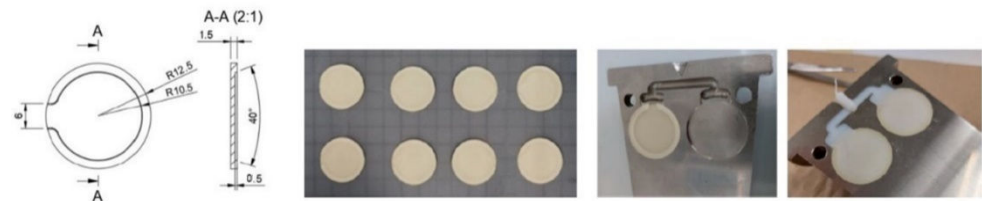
Circular inserts: design, fabricated parts, mould fitting and injection moulding trial.
